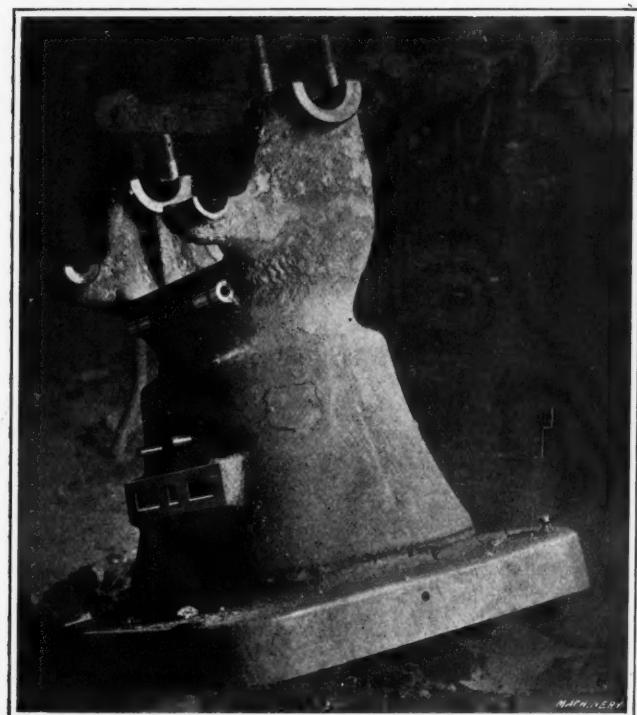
Duplex Pump Base showing Finished Weld
